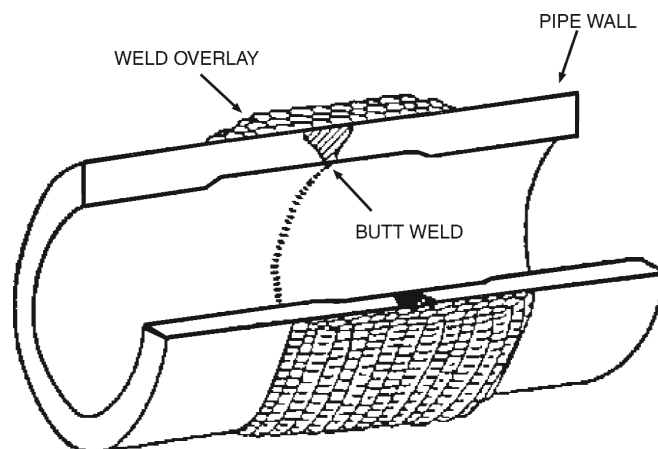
WELD OVERLAY REPAIR
